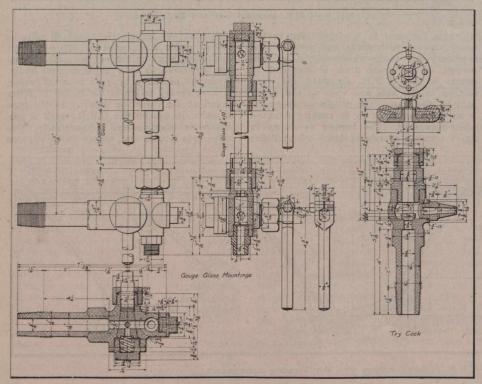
C.N.R. Standard Gauge Glass Mountings and Try Cock.
